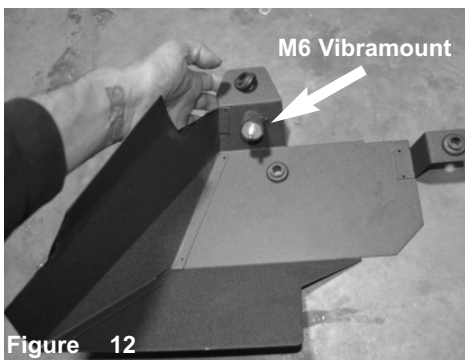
Install the M6 vibramount to the M6 threaded insert on heatshield. Install the grommets to the holes on the heatshield.
